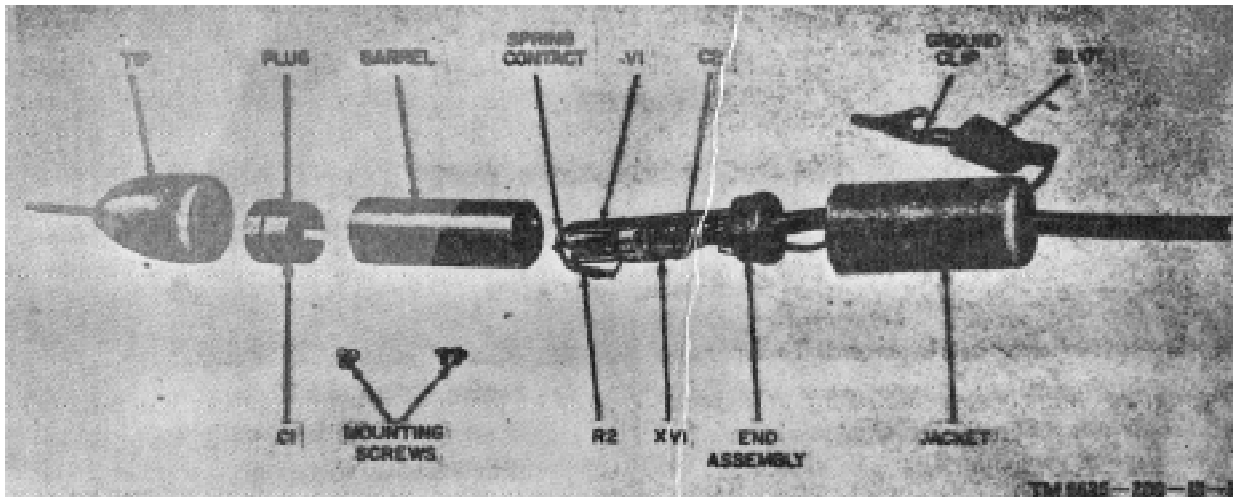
Changed Multimeters ME-26B/U and ME-C/U, and Multimeter ME-t6D/U AC probe disassemble
